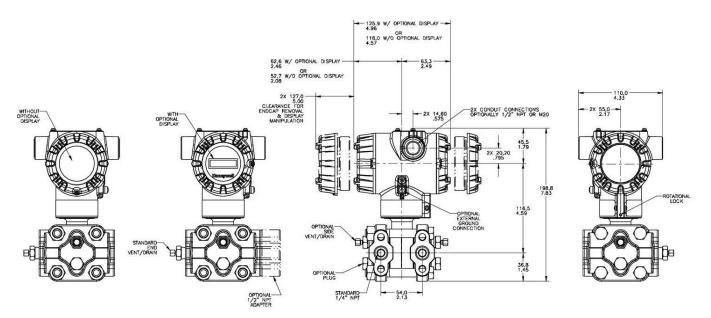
Typical mounting dimensions of STD720, STD730 & STD770 for reference only
